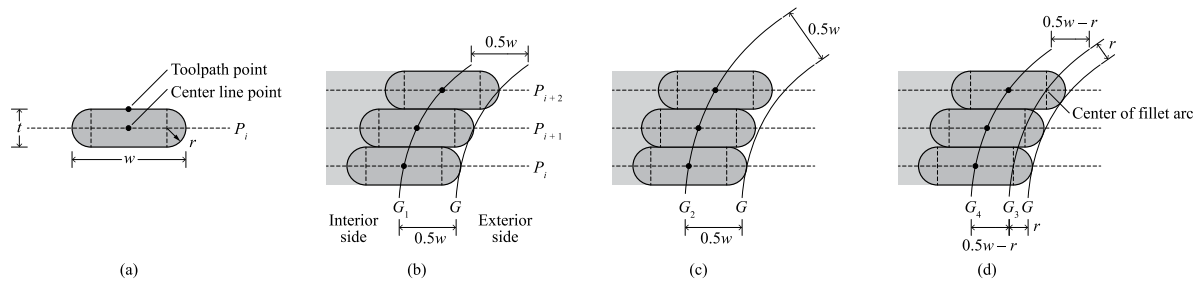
Surface and toolpath offset settings for accurately matching the input  $G$  and printed layers: (a) sectional model of the extrusion; (b) toolpath offsetting method; (c) surface offsetting method; and (d) combined method.
